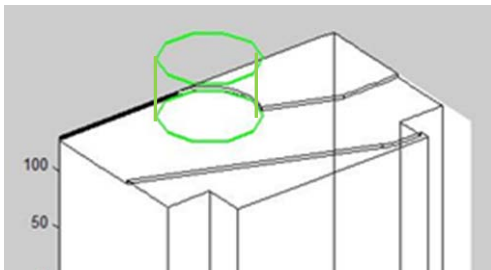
Cutting test #1, simplified visualization of the tool-workpiece interaction emulated by the geometric engine module
